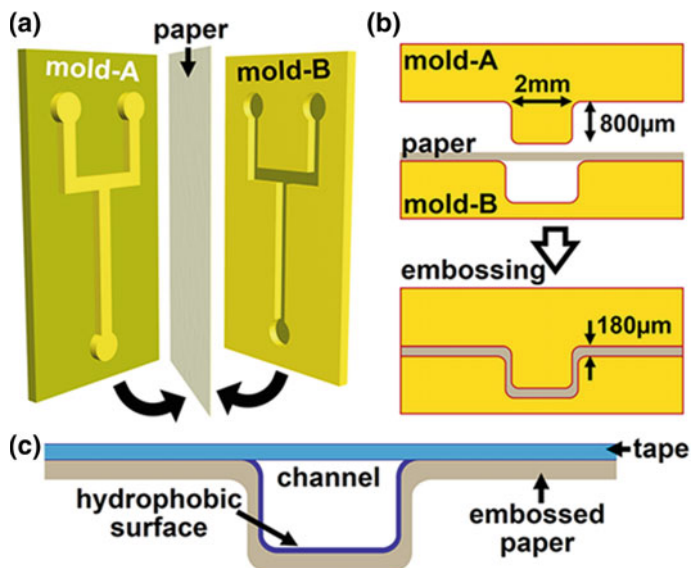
Steps in embossing for fabrication of μ PADs. a Compressing of sheet of paper between two plastic moulds. b Cross-sectional view of the embossing process. c Cross-sectional view of the paper channel with adhesive tape covering it on top. Reprinted with permission from Thuo et al. (2014). Copyright (2014) American Chemical Society
